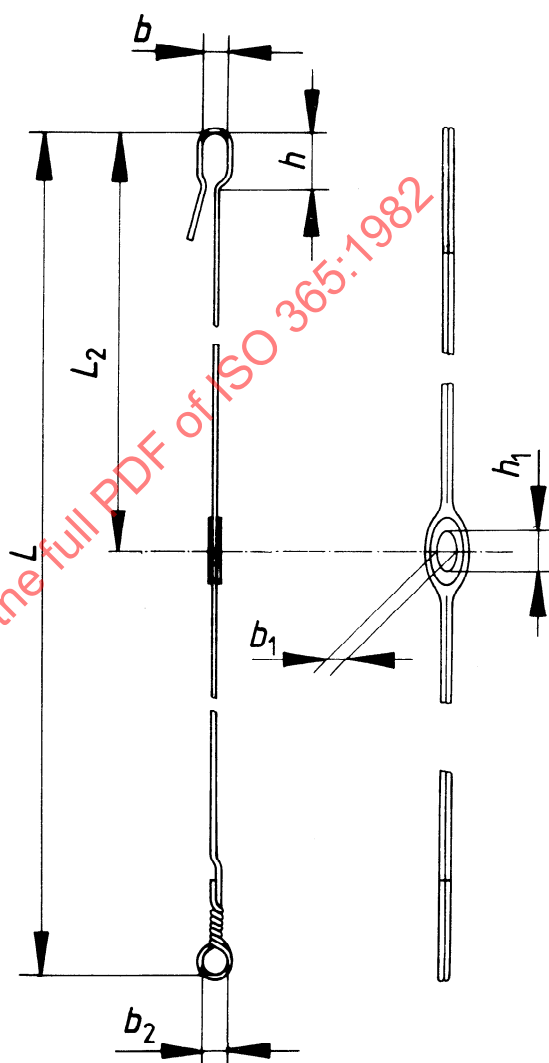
Heald type B, with upper end loop bent in U-shape; lower end loop, O-shaped
